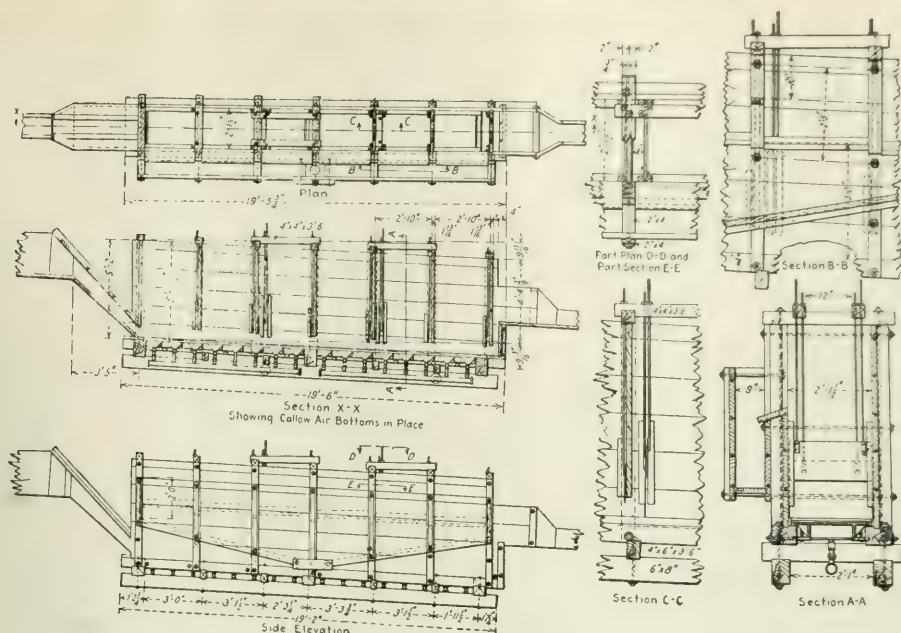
EXPERIMENTAL INSPIRATION FLOTATION MACHINE
